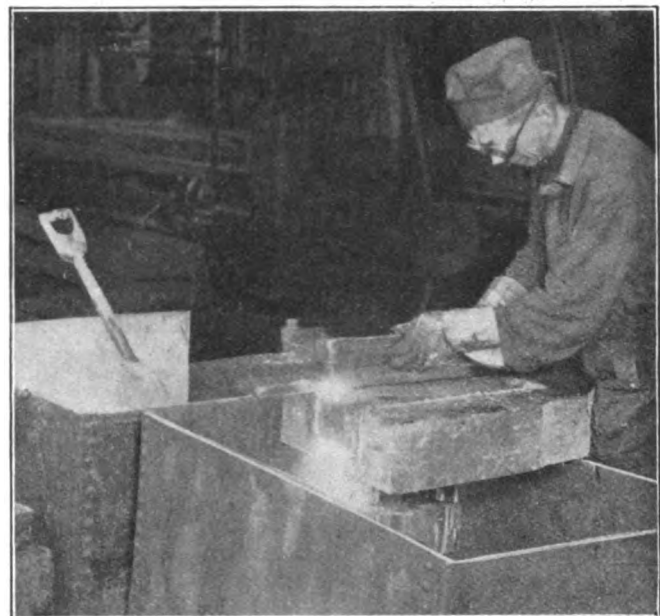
BLANKING OUT MAIN ROD WITH GAS TORCH
